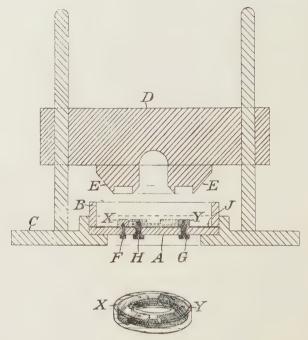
MOULDING APPARATUS FOR CONTACT RINGS.
